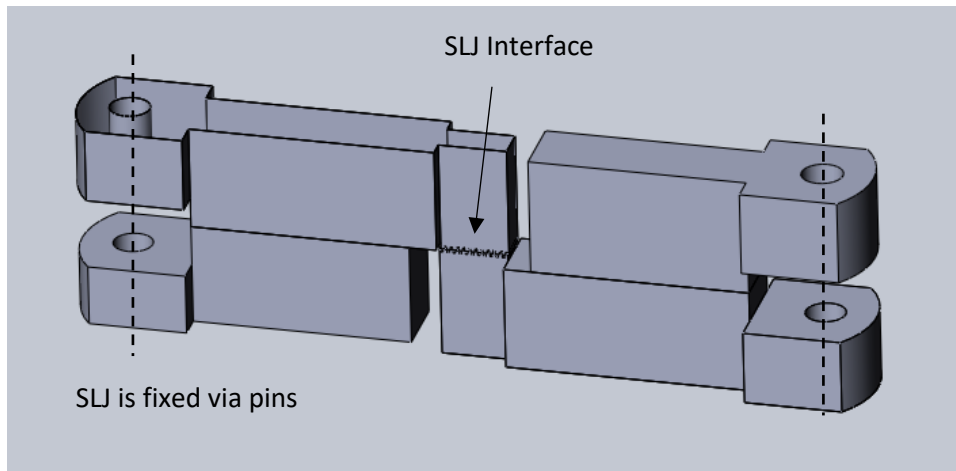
CAD image of the 3D-printed single lap joint setup. Additional fixtures are bonded to the lap joint to mitigate eccentric bending that could lead to premature bulk failure.
